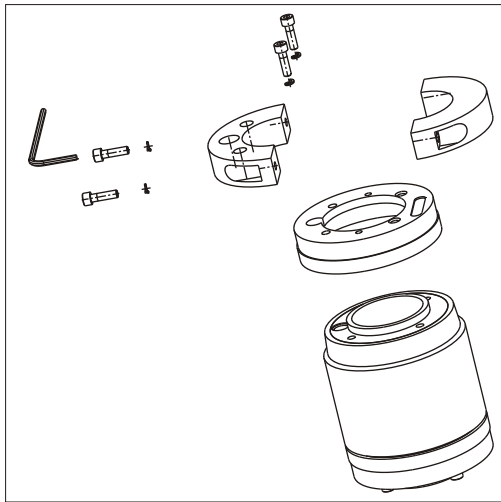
Removing the Side Clamps and Cover from the Air Chuck Body.
